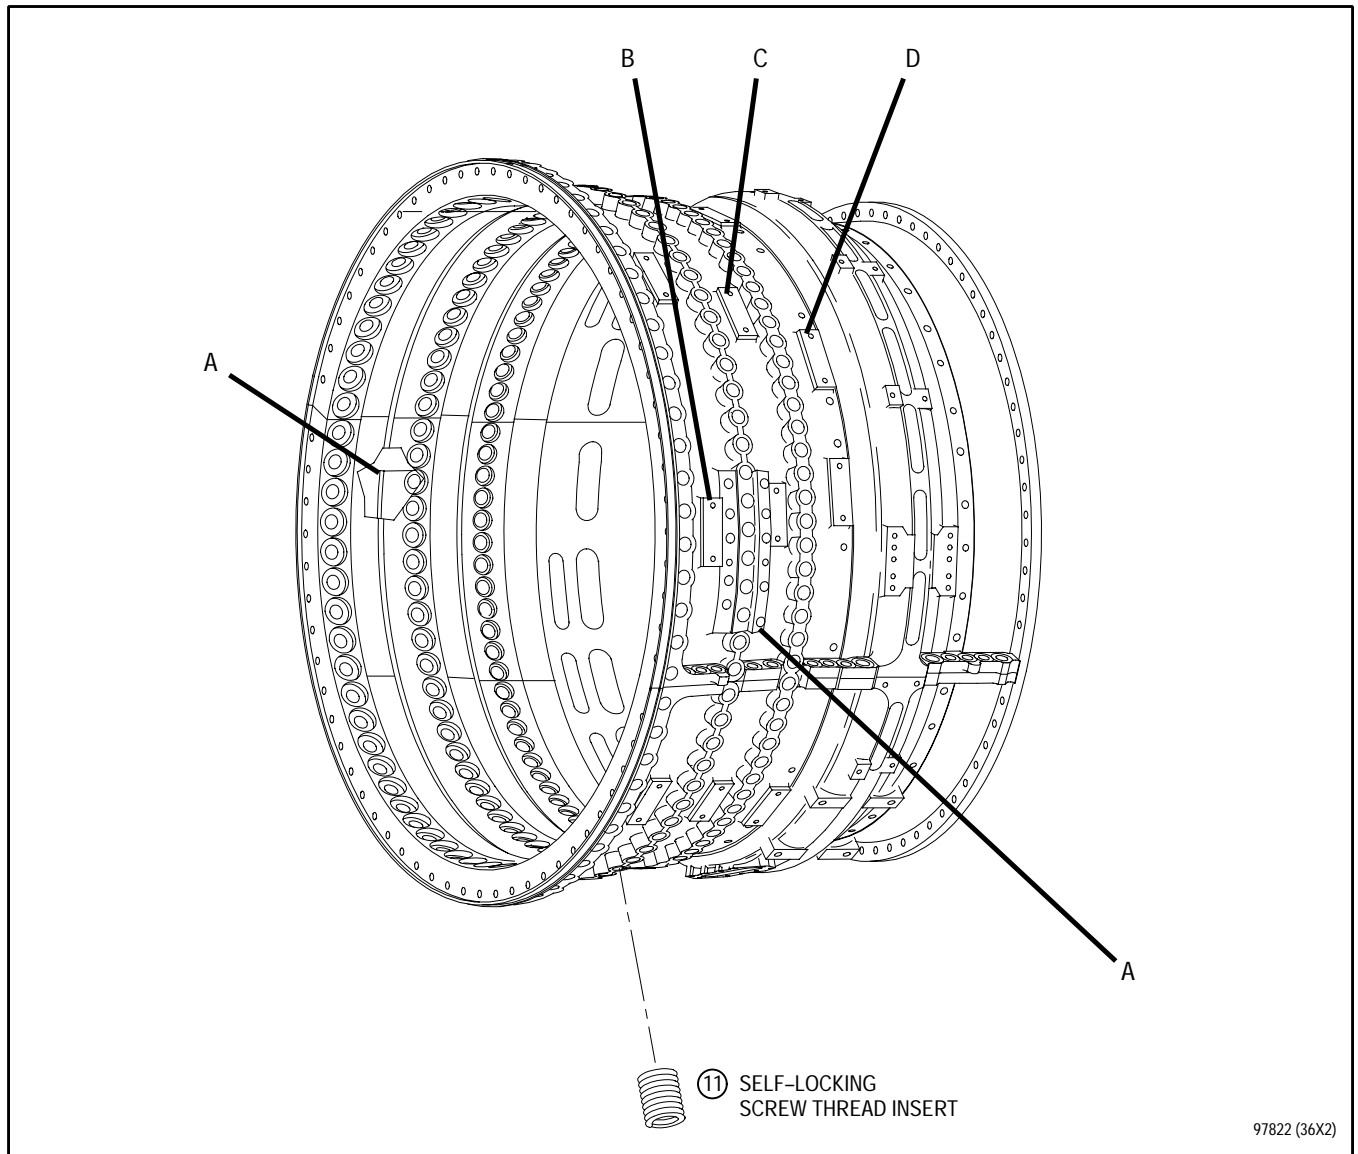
Fourth Through Ninth Stage Compressor Case Set - Inspection (Sheet 2 of 3)
